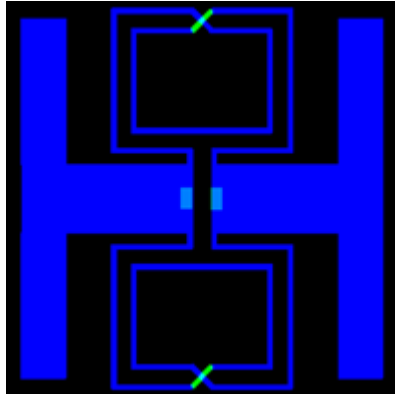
Gerber File of Etch Layout with Solder Mask in Light Blue and the Back Side Cu Is in Green.
